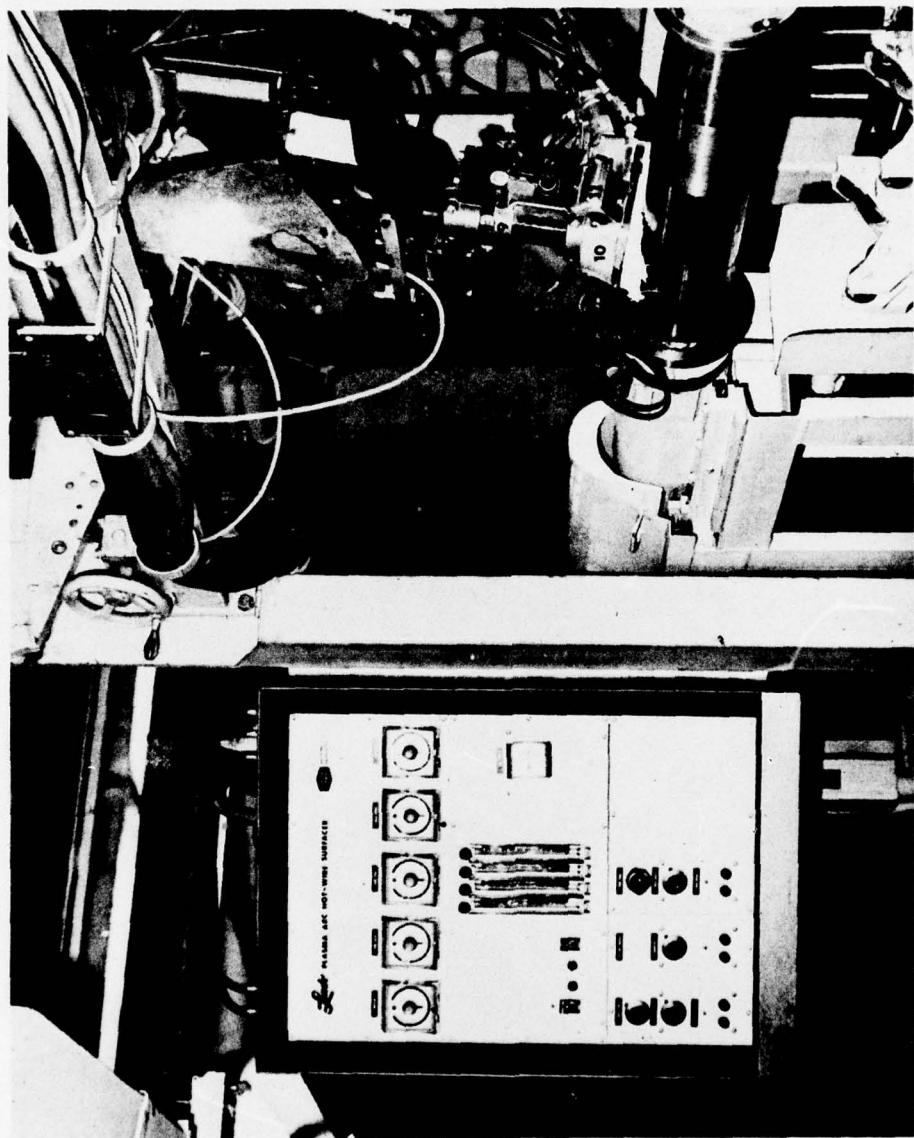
PAHW Torch Assembly with Projectile in Position for Overlaying.
